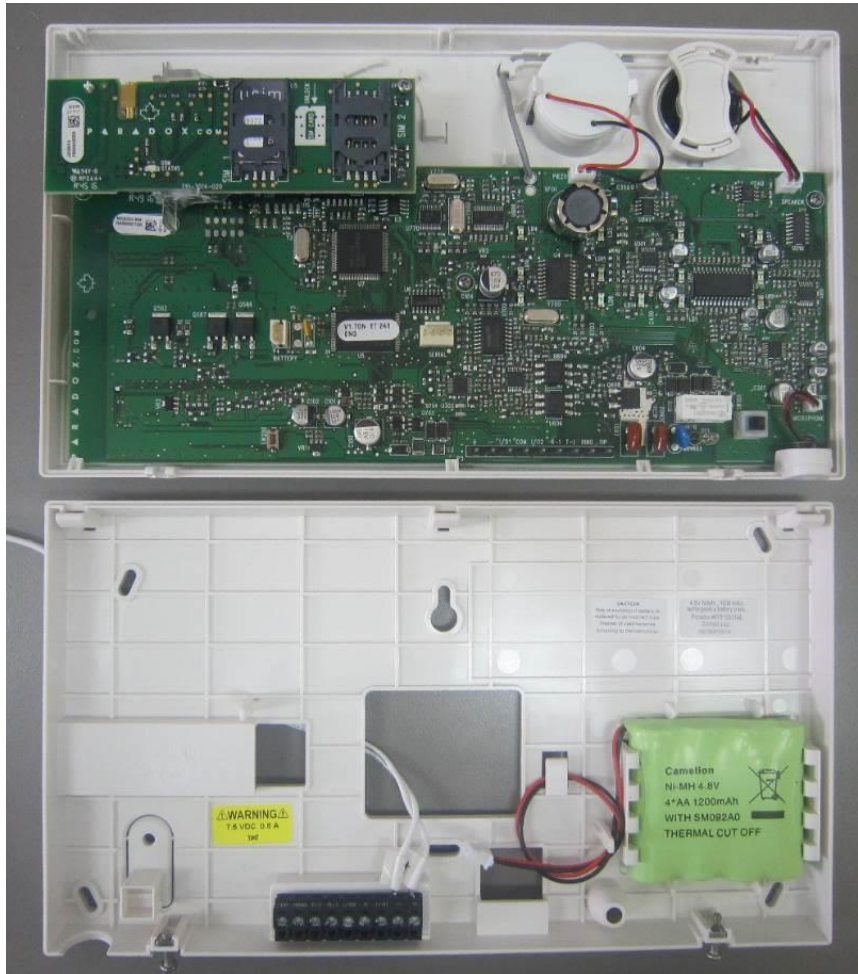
, 5.1.11 – MG5050 PCB view
